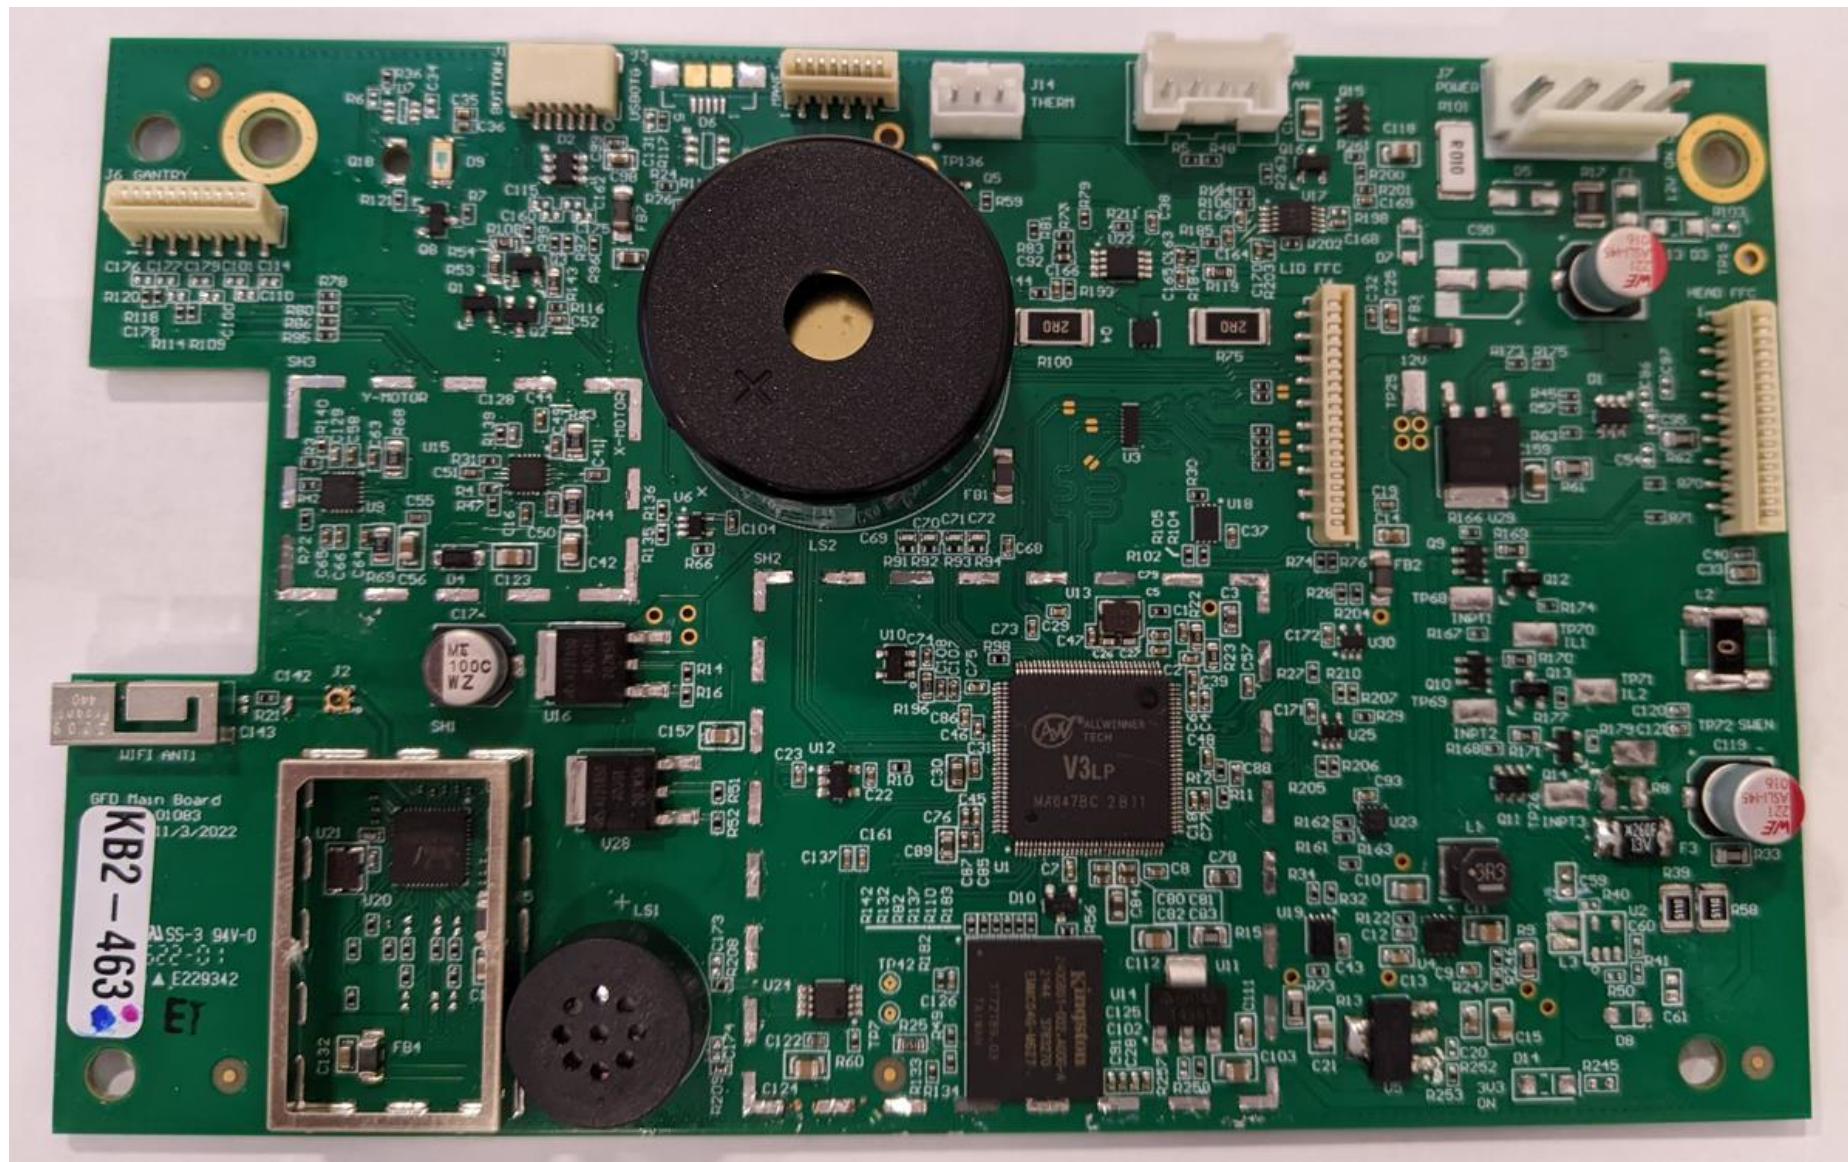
GF-PCA-00155- Control PCBA Top Side with EMI Shield uninstalled.
